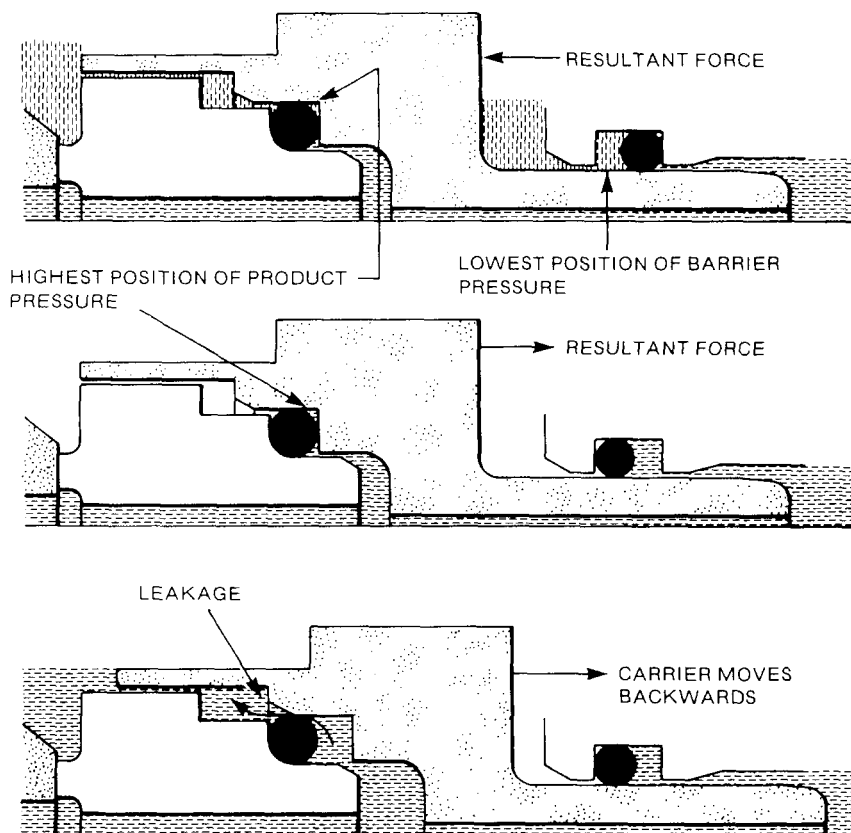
HYDRAULIC FORCES ON INNER SEAL OF A DOUBLE SEAL
